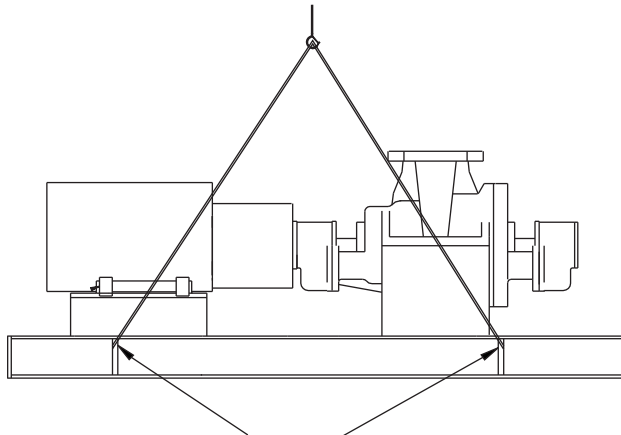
Example of the proper lifting method for baseplate-mounted units with a driver
